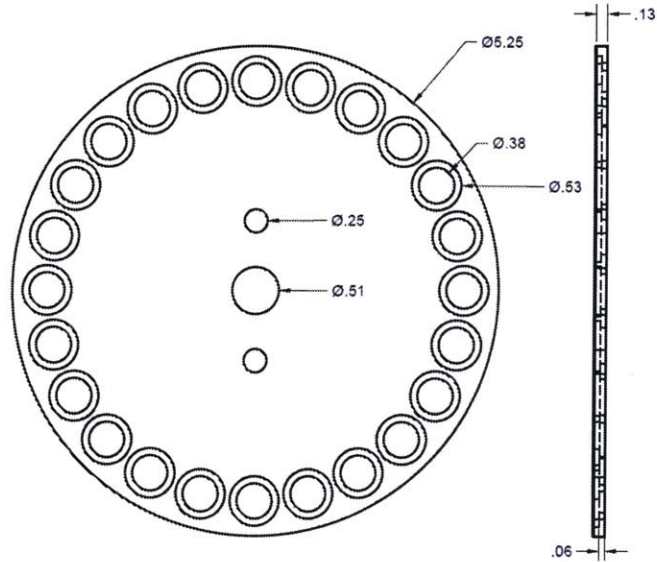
Salt Wheel Holder – This 1/8" thick plate of aluminum was counterbored to 1/16" depth, such that thin pellet-pressed alkali-halide salts could set into the .53" diameter recesses with 0.38" inner bore such that the proton beam and optical path may traverse through the respective salts. This design requires an additional plate as shown below in Figure 15 (A) with 0.38" bores such that the salts do not fall out of the wheel inside of the chamber.
